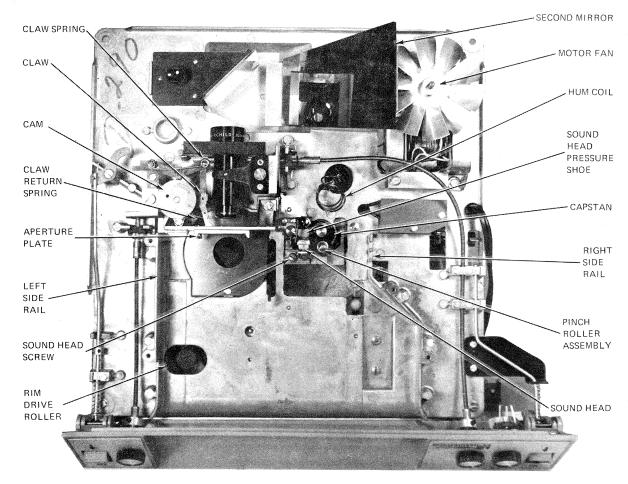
Operating Unit Assembly (Shown with roof plate removed)
